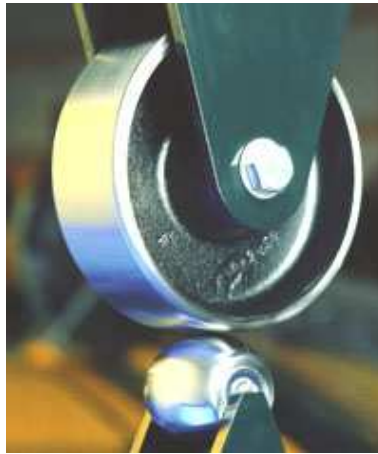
English wheel manufactured by Irvan-Smith, Inc. [1].
